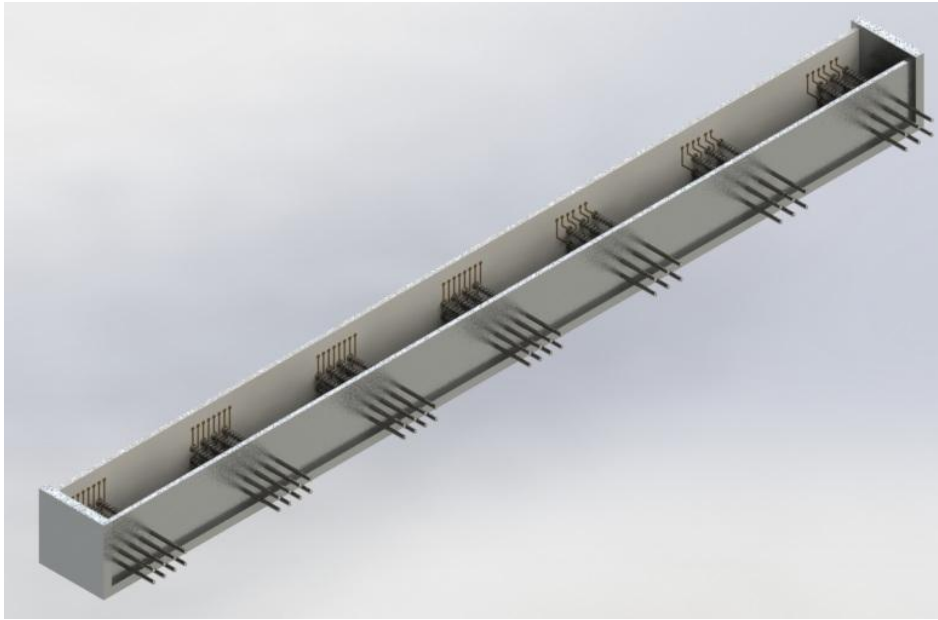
Rectangular Box Containing Spring-Loaded Pins
